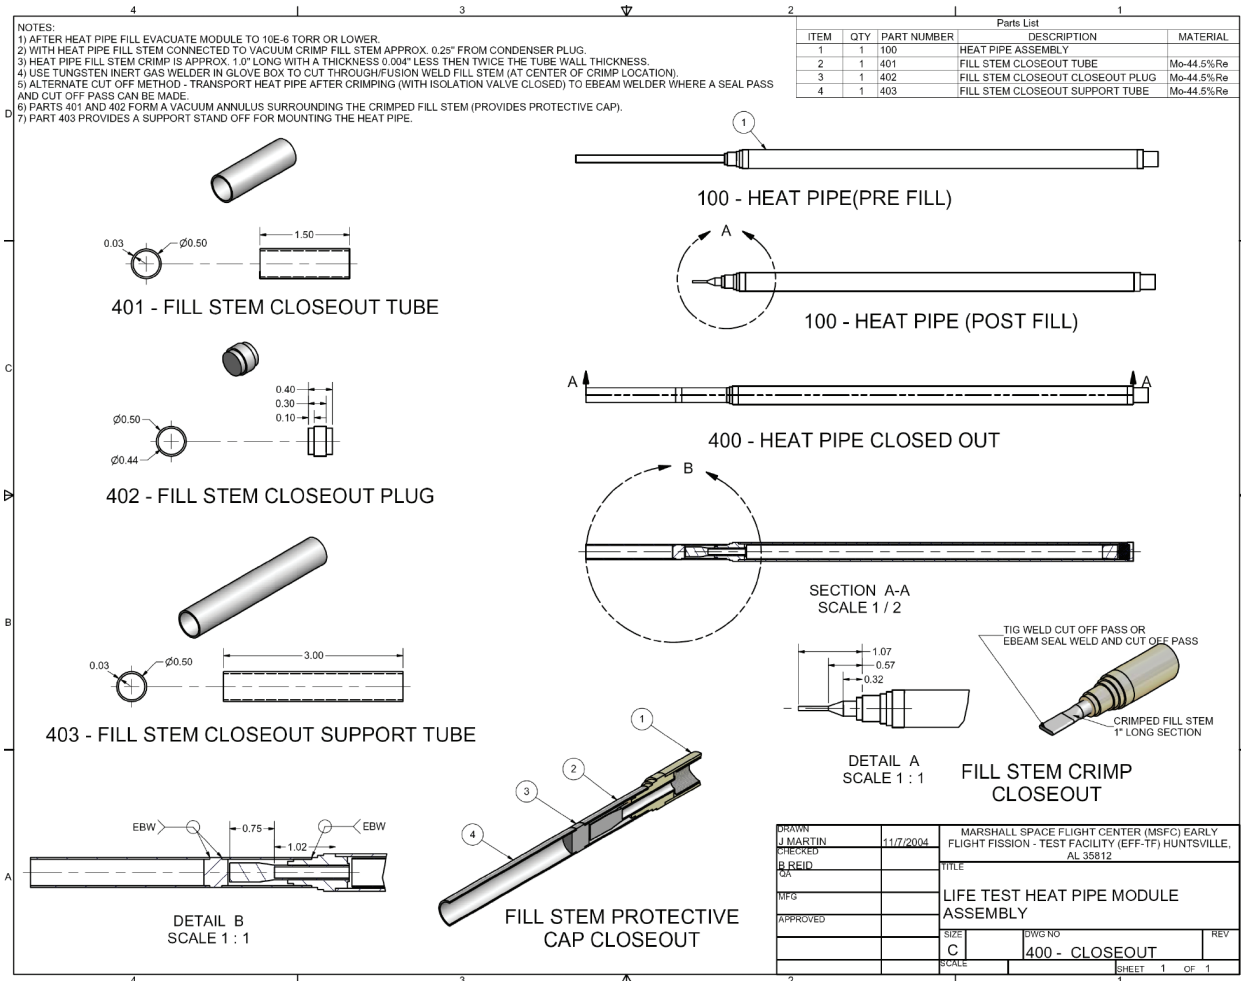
Method 1 to close out the heat pipe fill stem and provide mounting support.
